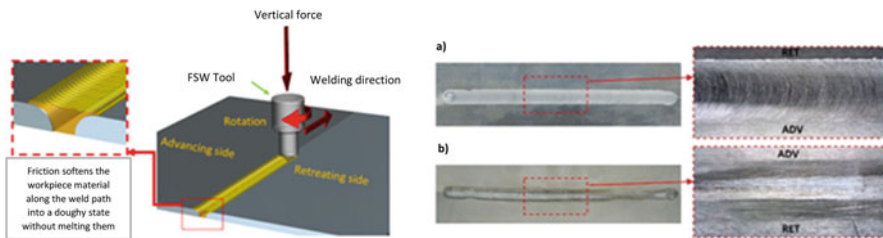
Scheme of the FSW process—a lap joint and example joint without any defect (advancing side-a, retreating side-b) (Myśliwiec et al. 2019)
